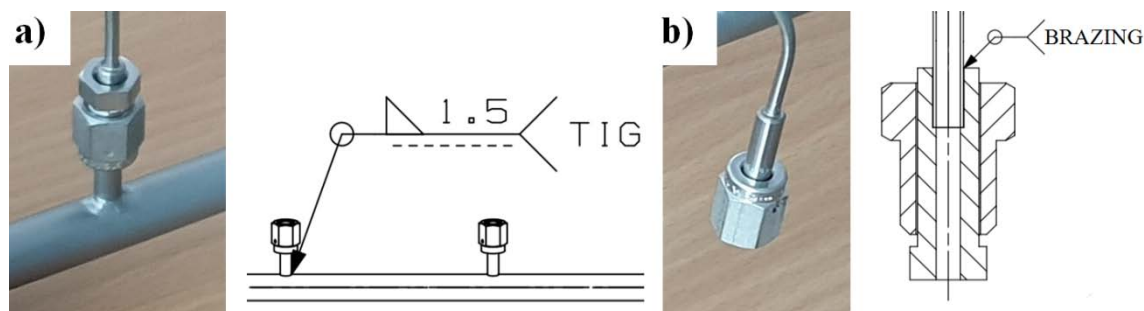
a) VCR welded to supply pipe using TIG; b) VCR brazed to helix pipe [33]
